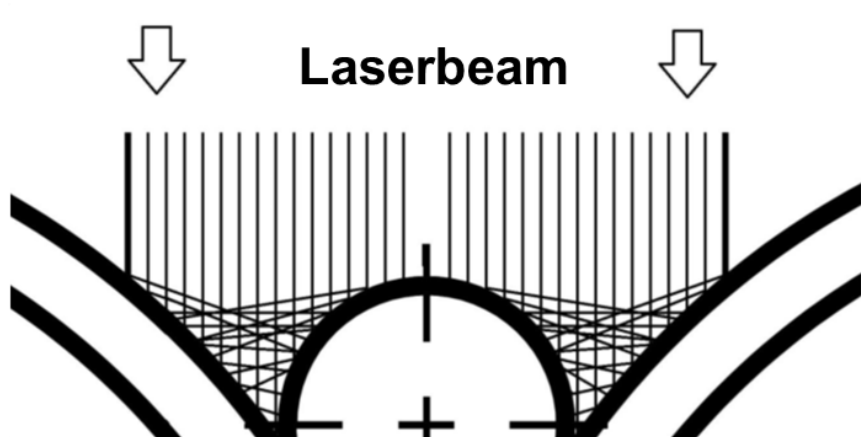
Focusing conditions during laser beam welding of capillary tubes with filler material due to reflection on wire surface and tube walls
